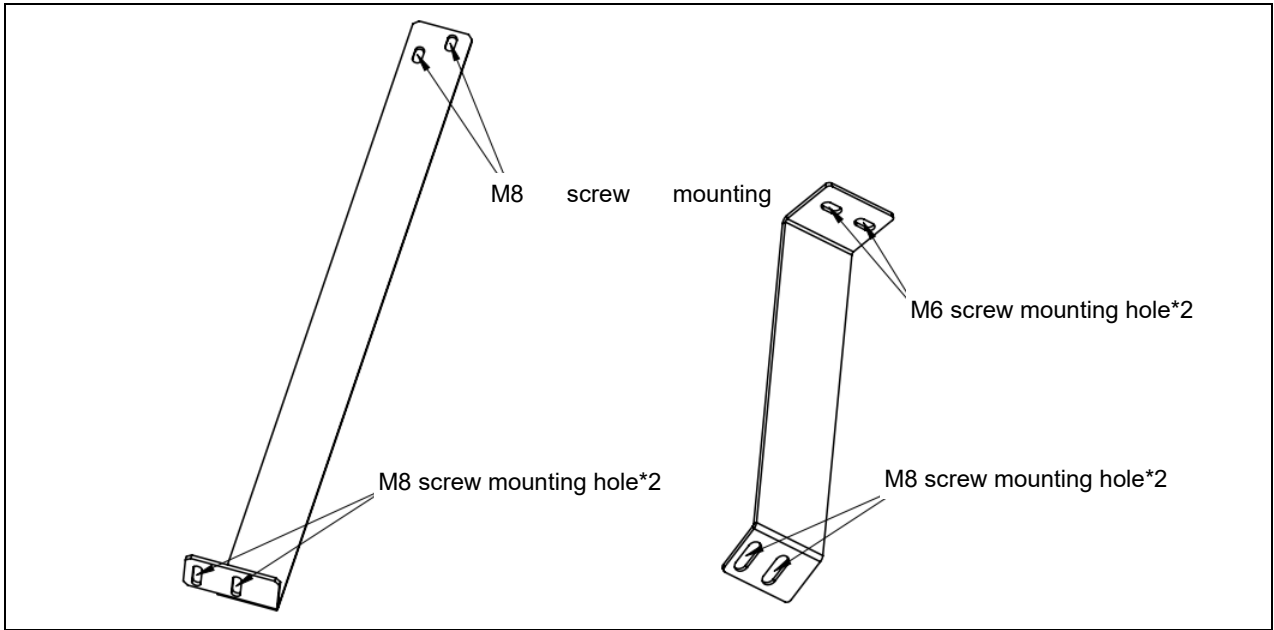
Robot fixed bracket (ER20B/10-2010-HI)
